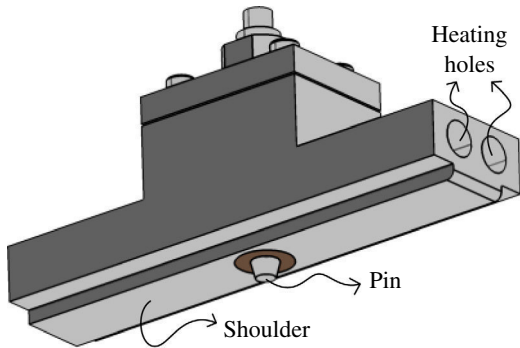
FSW tool with long stationary shoulder and conical threaded pin.
